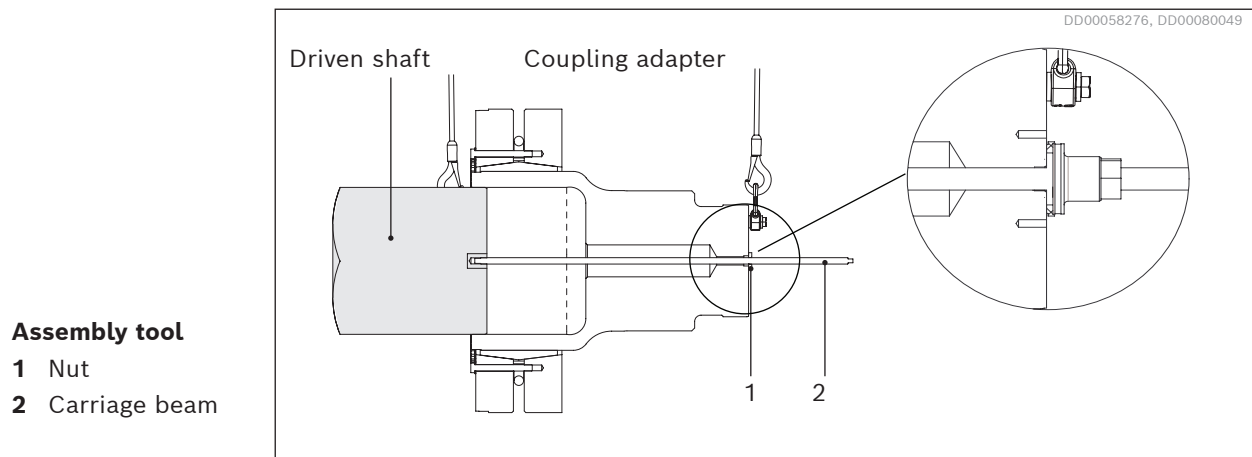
Mounting the coupling adapter on the driven shaft with the assembly tool.
